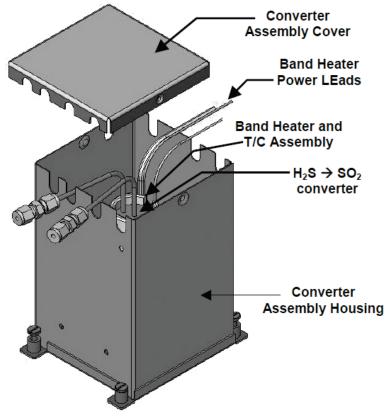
$H_2S \rightarrow SO_2$ converter assembly.
